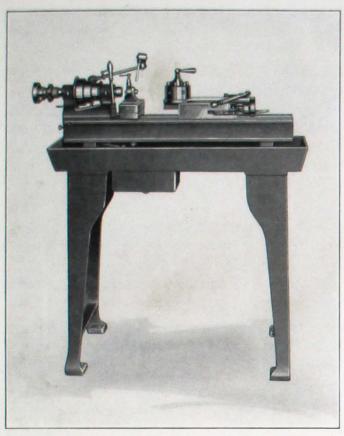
Equipped as Hand Turret Lathe on Oil Pan and Floor Legs.
